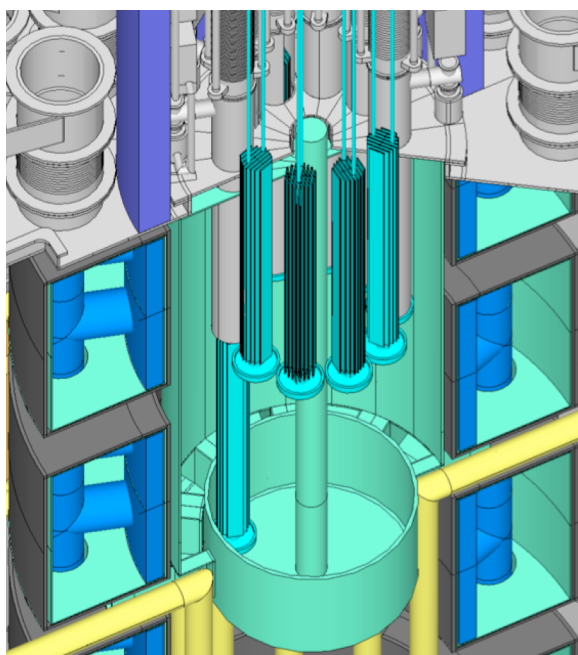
A close-up view of the cryopanel units inside the 80 K thermal shield.
